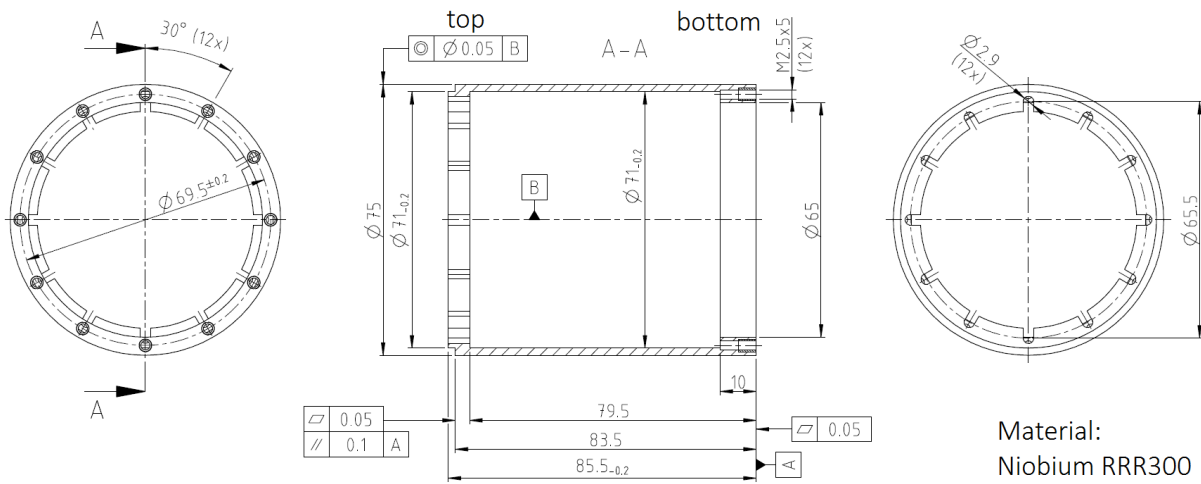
Technical drawing of the tube – from left to right: bottom view, cross section, top view. Property: Reuter Technologie GmbH, Alzenau.
